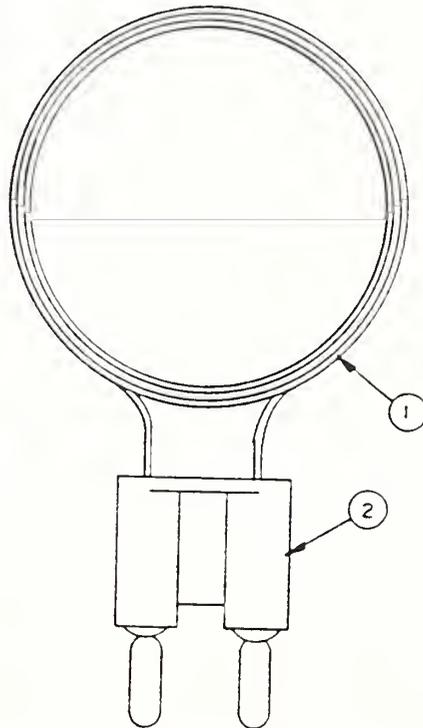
Current Loop, 30 Turns, Assembly Drawing
